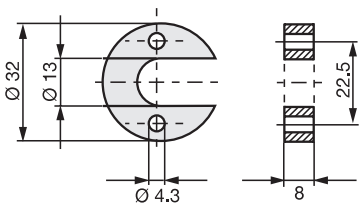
Installation dimensions of BTL-P-1013-4S position magnet
